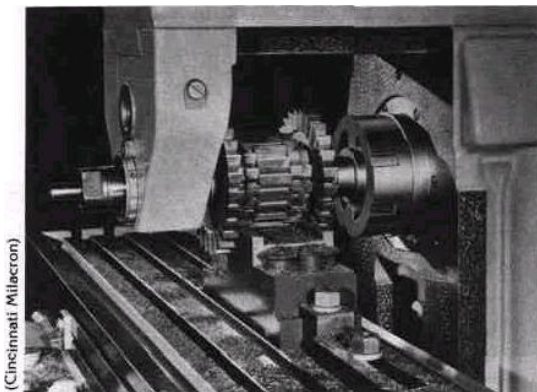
Milling a casting with several cutters mounted on the arbor of a horizontal milling machine. This is known as gang milling.
